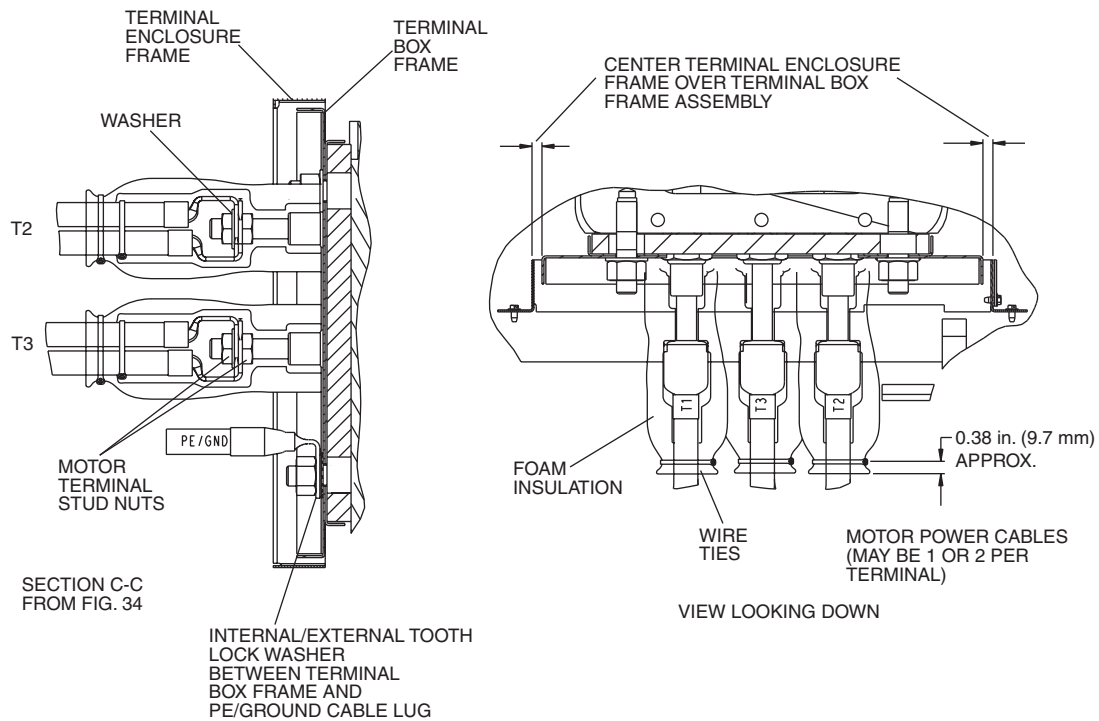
Motor Terminal Insulation (Q and R Compressors)
